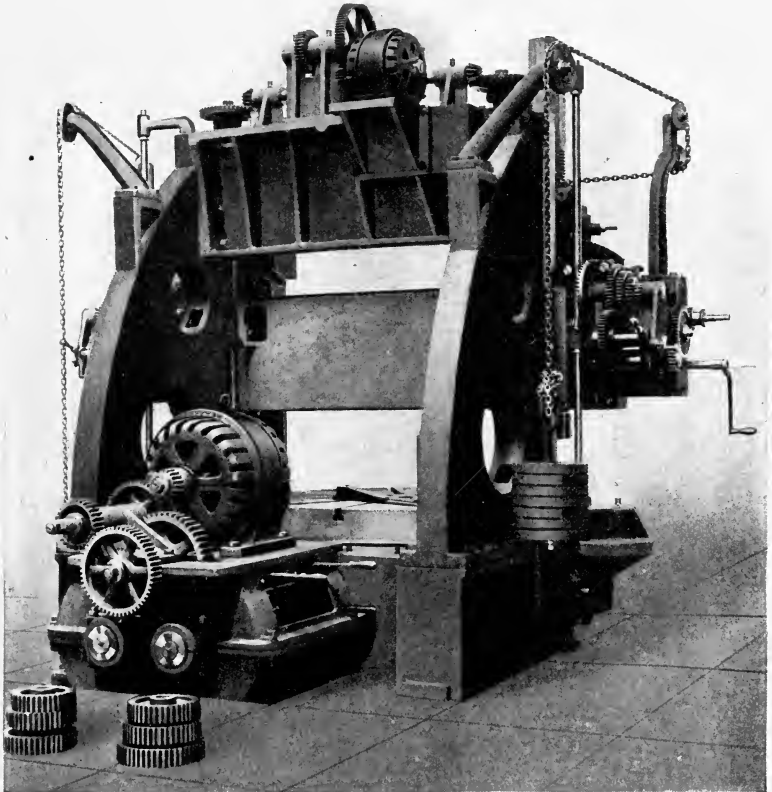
Motors geared to a 10-foot vertical boring mill. Main motor 15 h-p. Elevating motor 3 h-p. Westinghouse Co.
